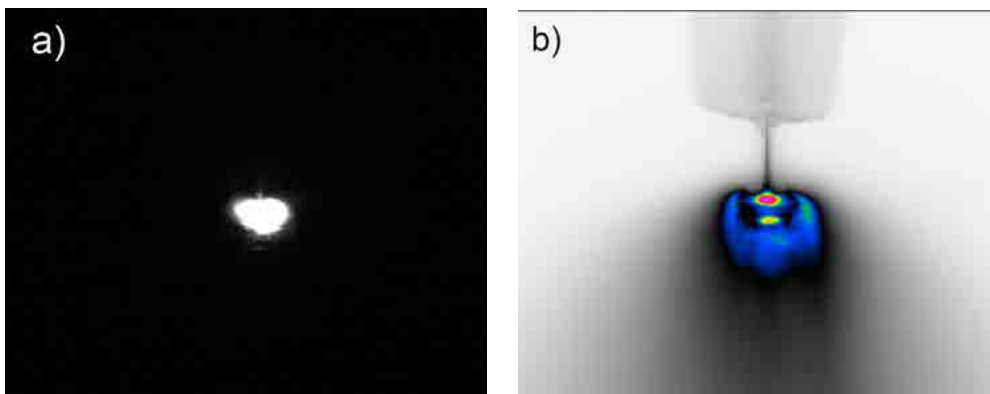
Examples of images presenting a welding arc recorded:
